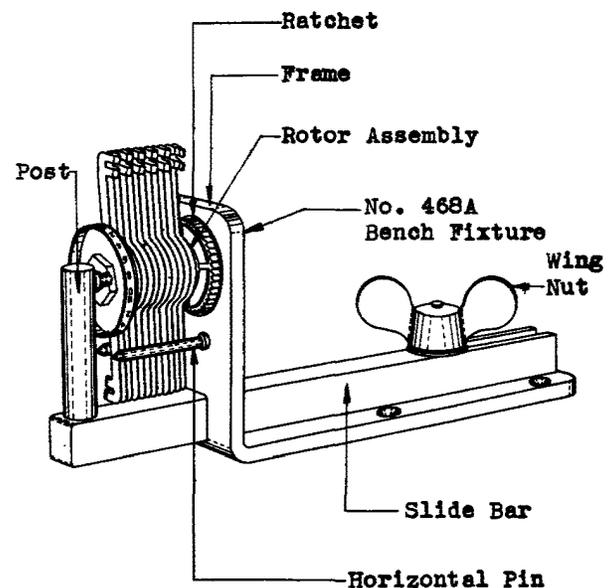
Mounting Hollow Shaft Rotor Assembly of Selectors and Switches
